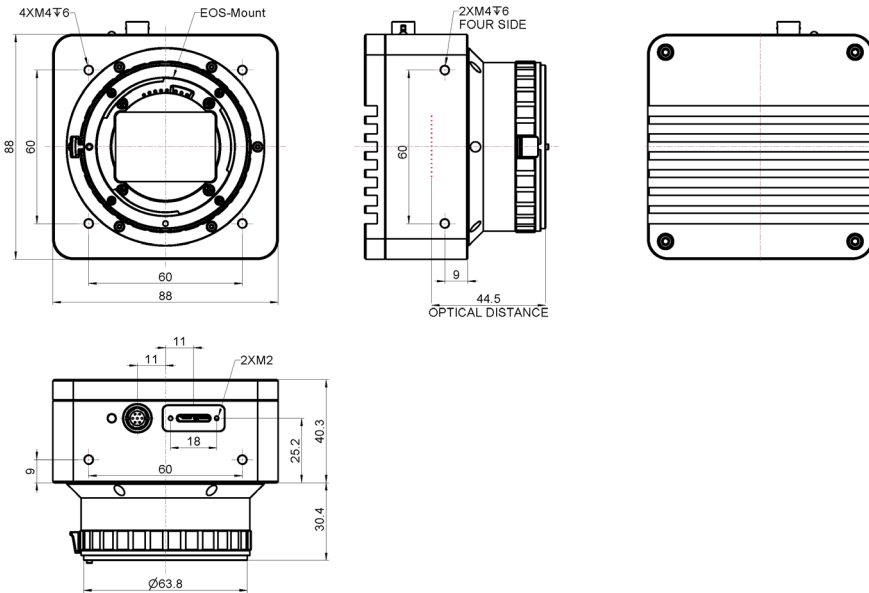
Dimensions of SCCXXX-AFU-EF camera housing (mm)
